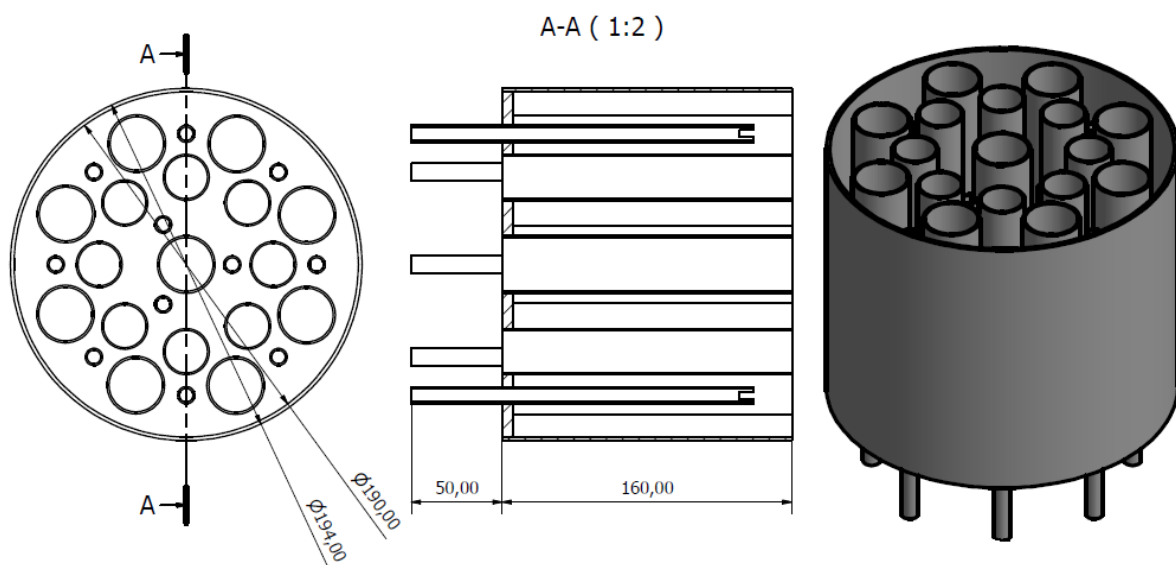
DRAWINGS OF THE DESIGNED LIQUID DISTRIBUTOR
